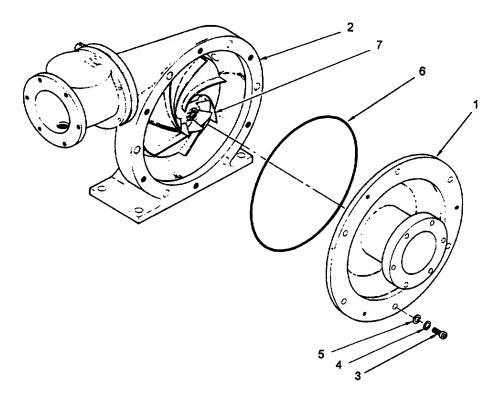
Fuel Transfer Pump Inlet O-Ring Replacement
